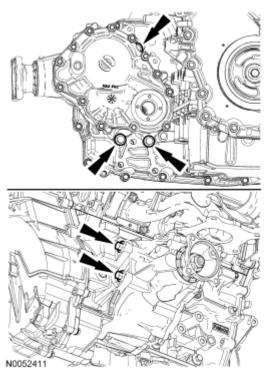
Locating Oil Fasteners On Inspection Cover Courtesy of FORD MOTOR CO.
